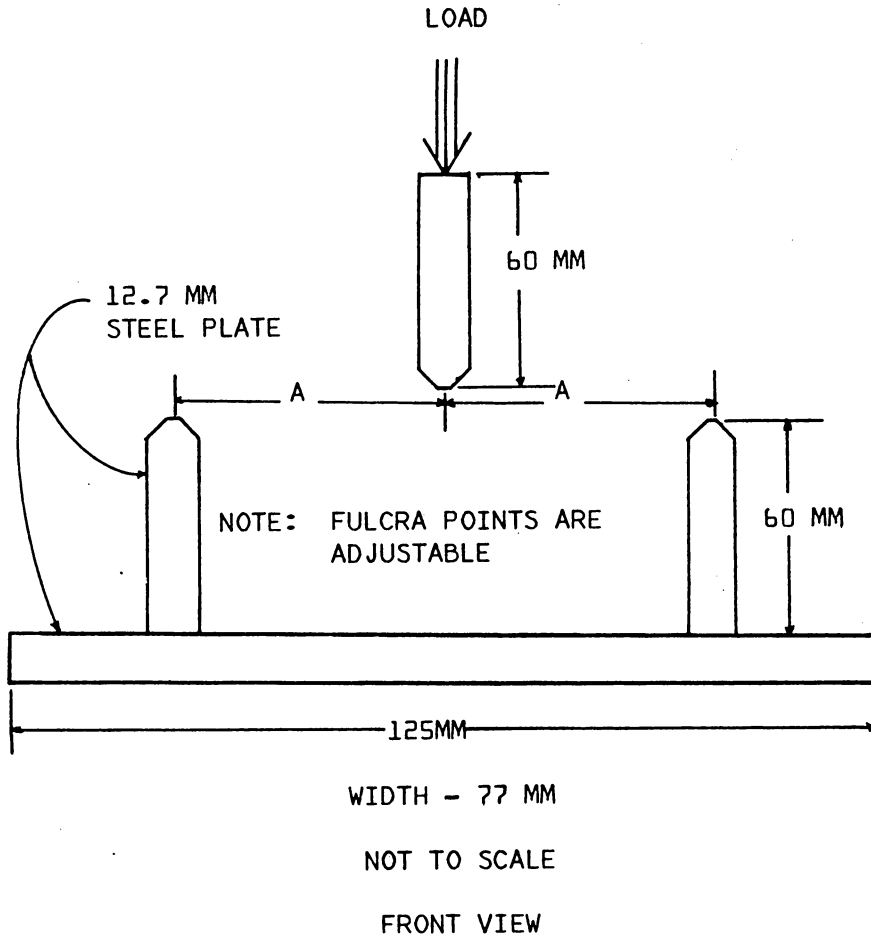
Schematic of the three point bending test fixture used with the Instron.
